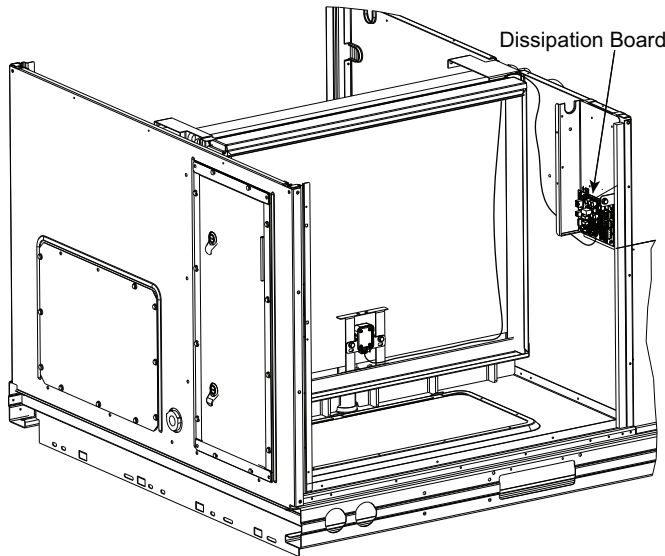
Location of Dissipation Control Board (shown with dust cover removed)
